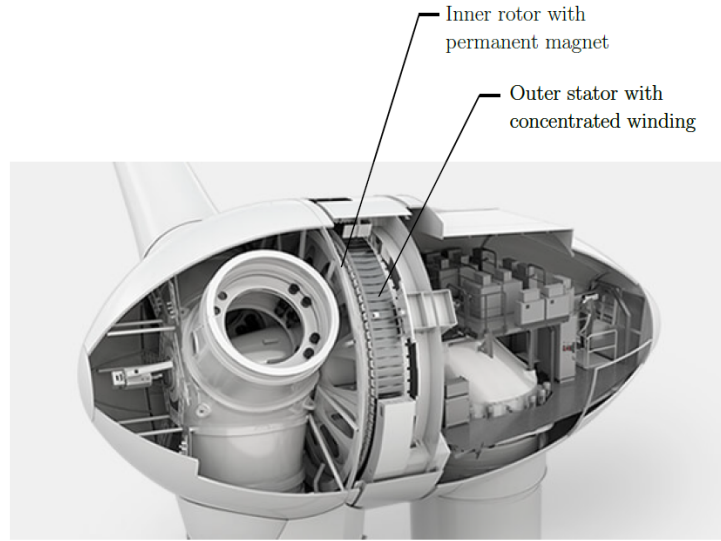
Exploded view of the Enercon wind turbine with direct driven type IV generator [5]
